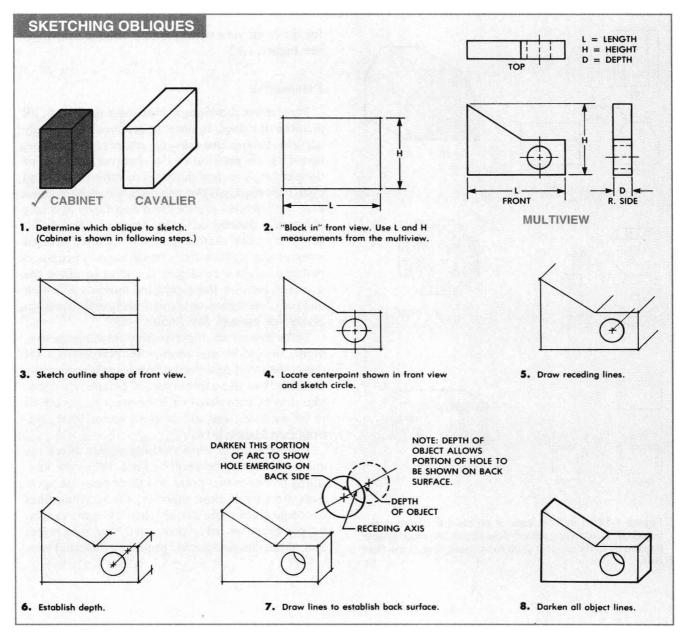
Oblique drawings can be quickly sketched to convey a "picture" of an object.
